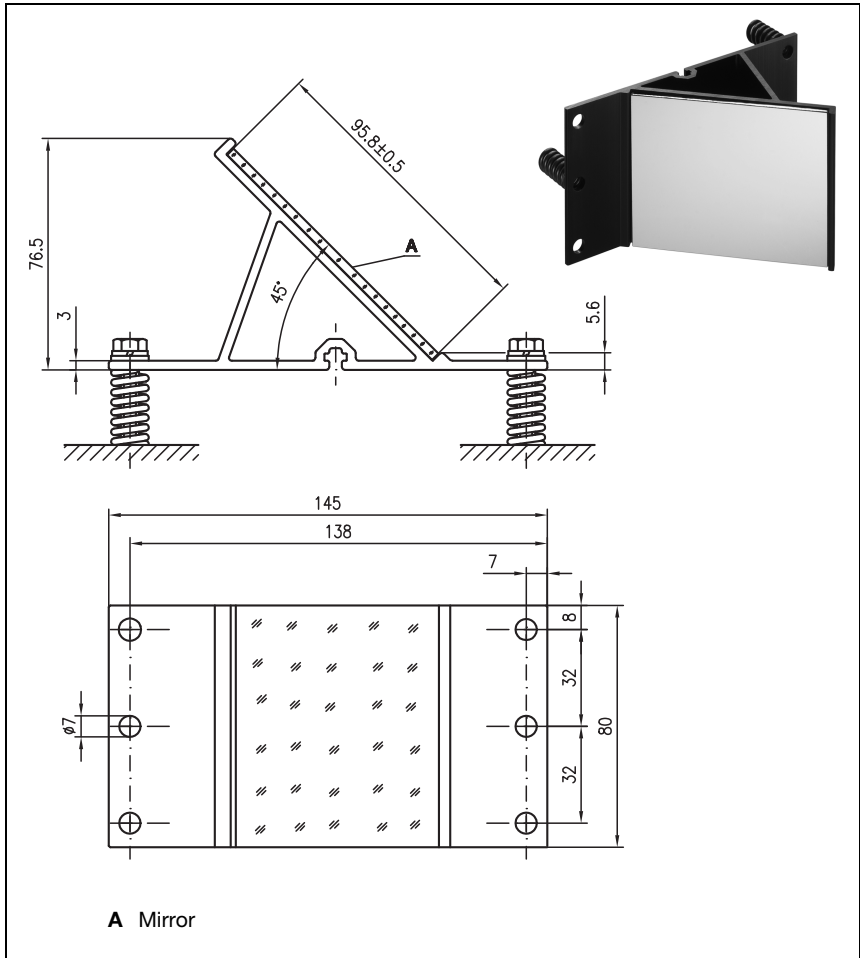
Photo and dimensioned drawing of the US 1 OMS deflector unit
